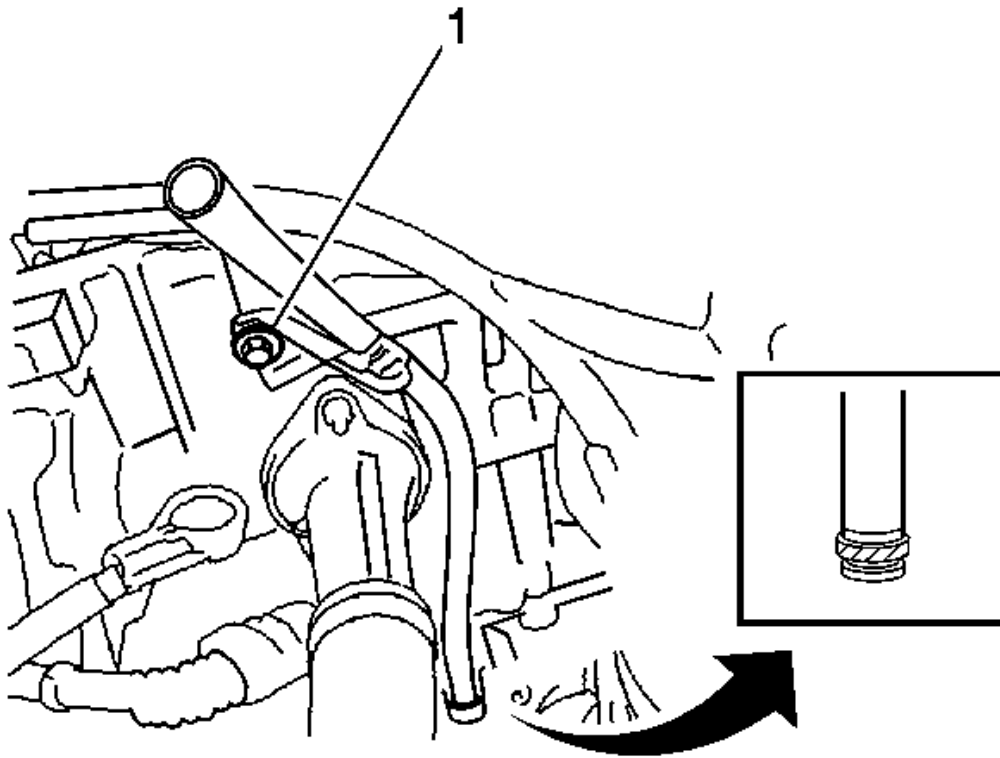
Identifying Engine Oil Level Dipstick Guide Bolt
